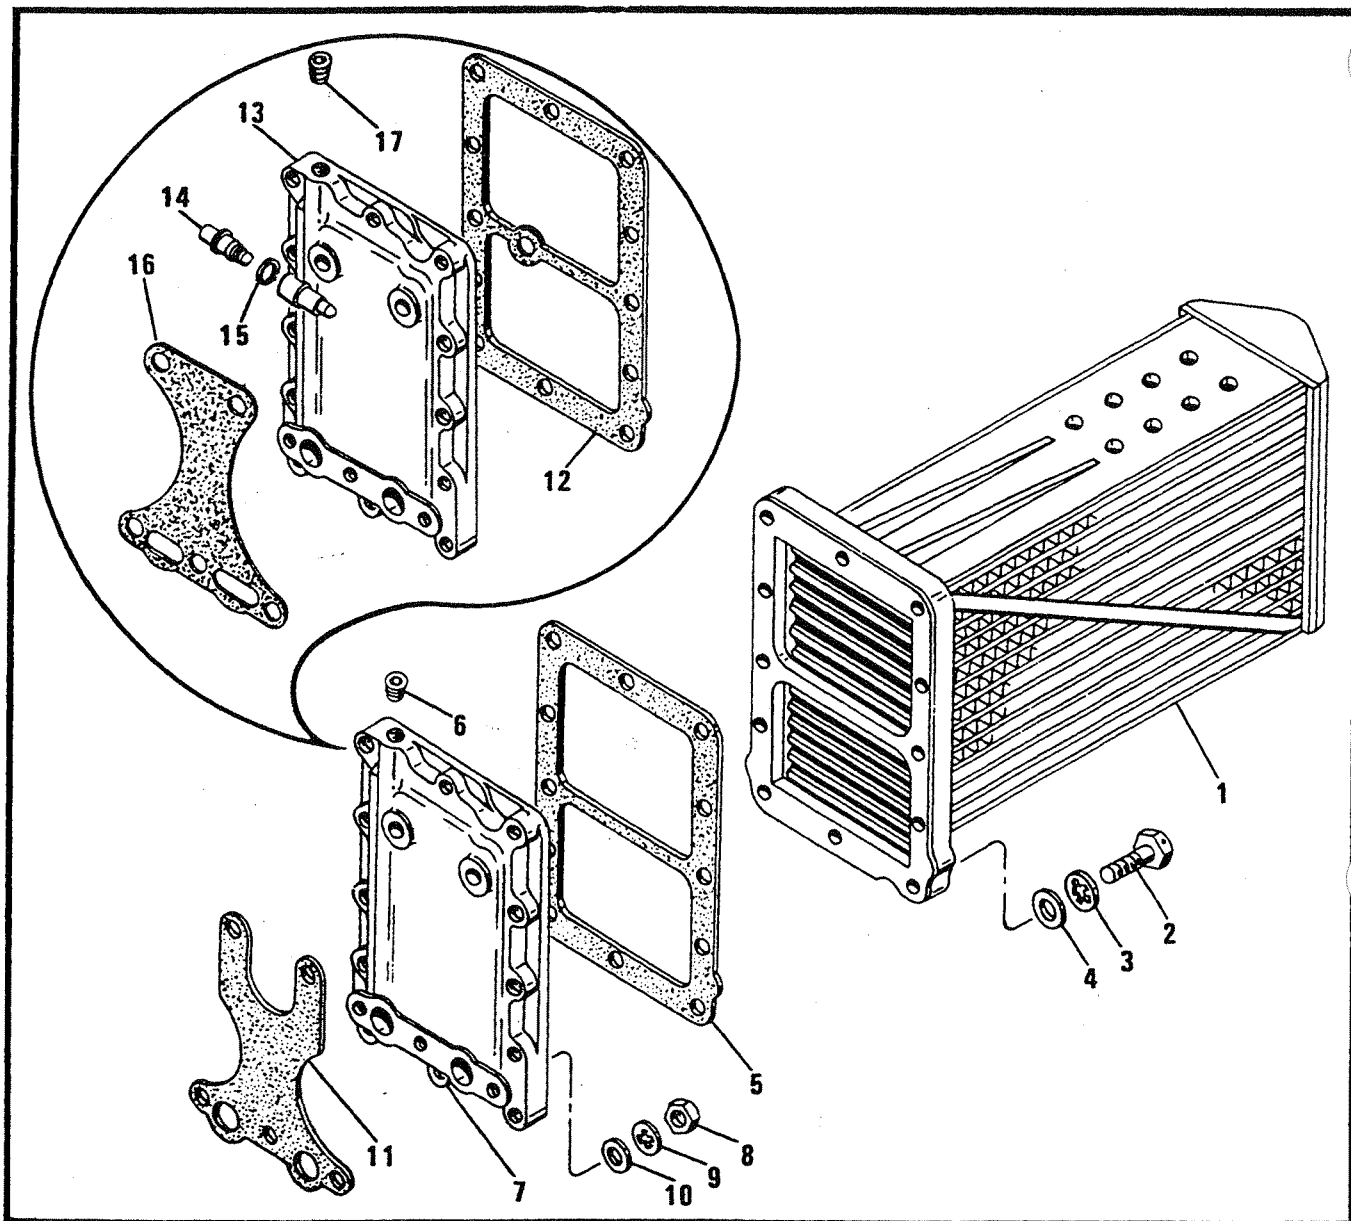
C. OIL COOLER, O-470-B,M.
